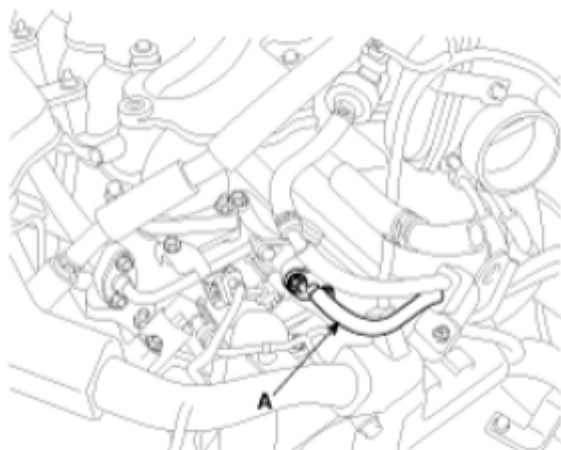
Identifying Fuel Inlet Hose To Delivery Pipe
